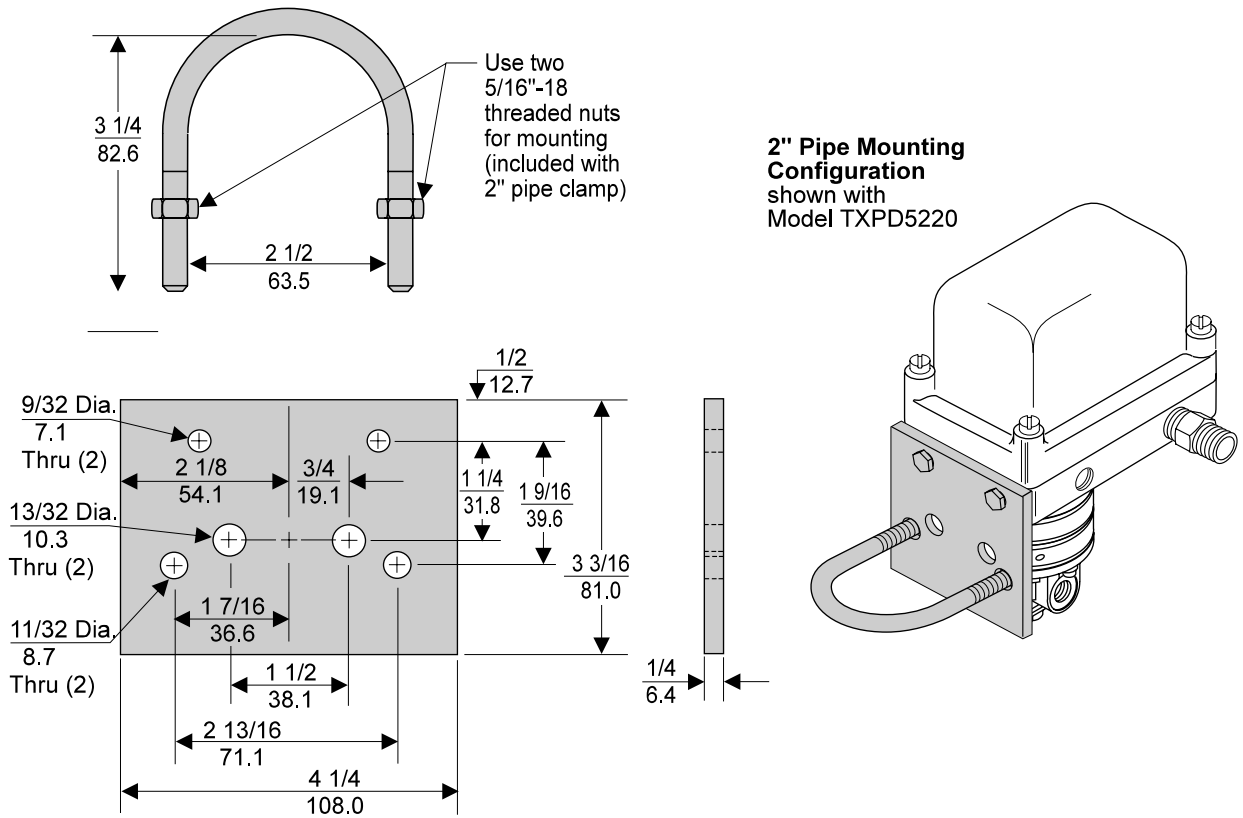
Mounting Kit EA-14140. (Sold Separately)
